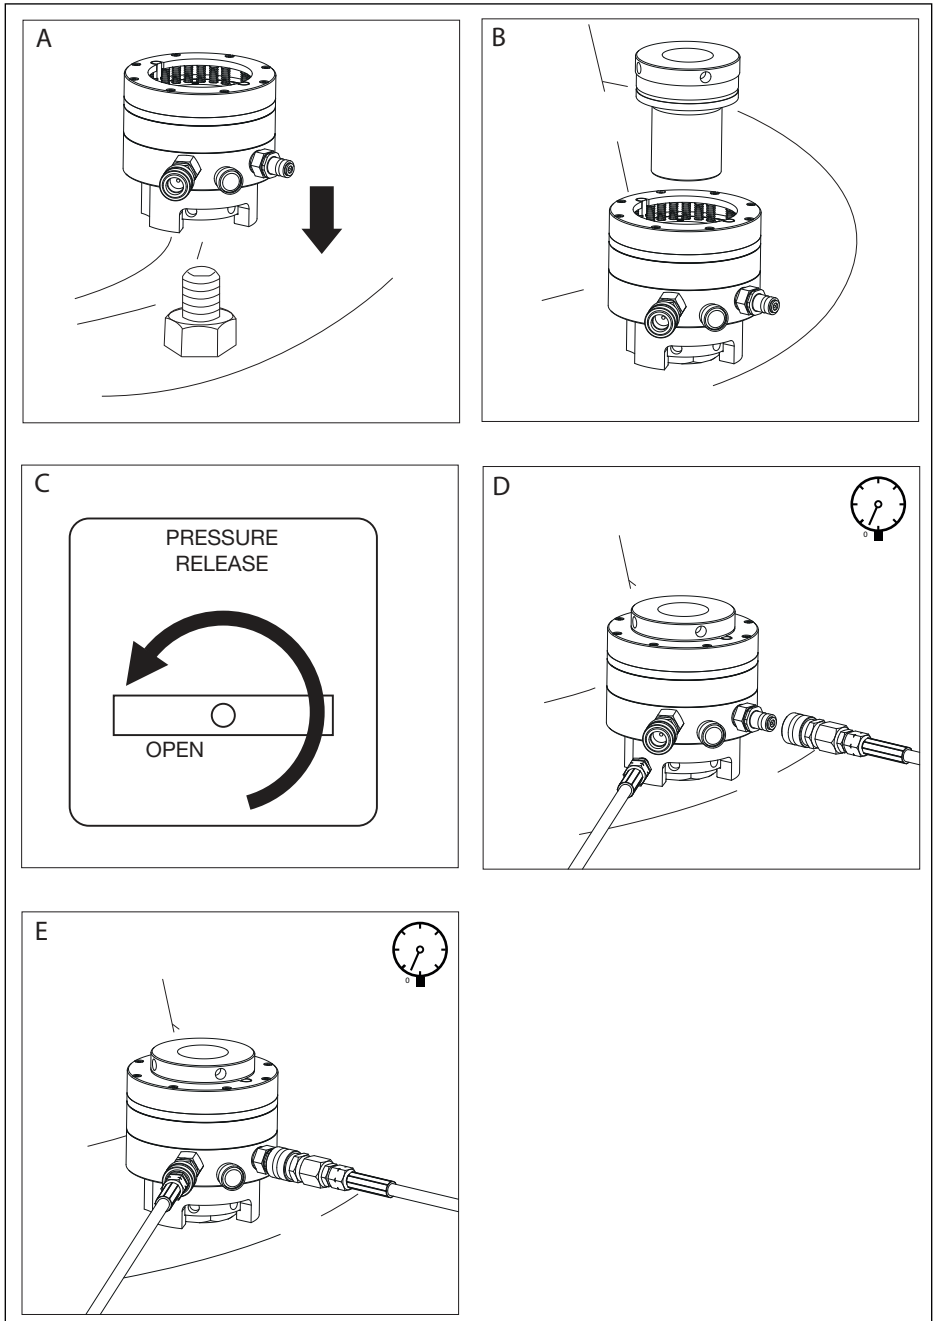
, HYDRAULIC TENSIONER INSTALLATION
